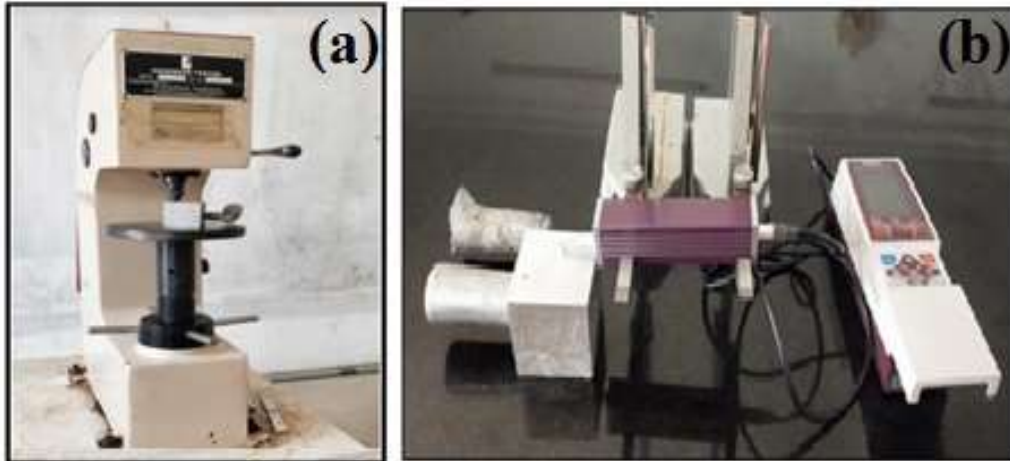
(a) Brinell hardness test machine (b) Surface roughness tester
